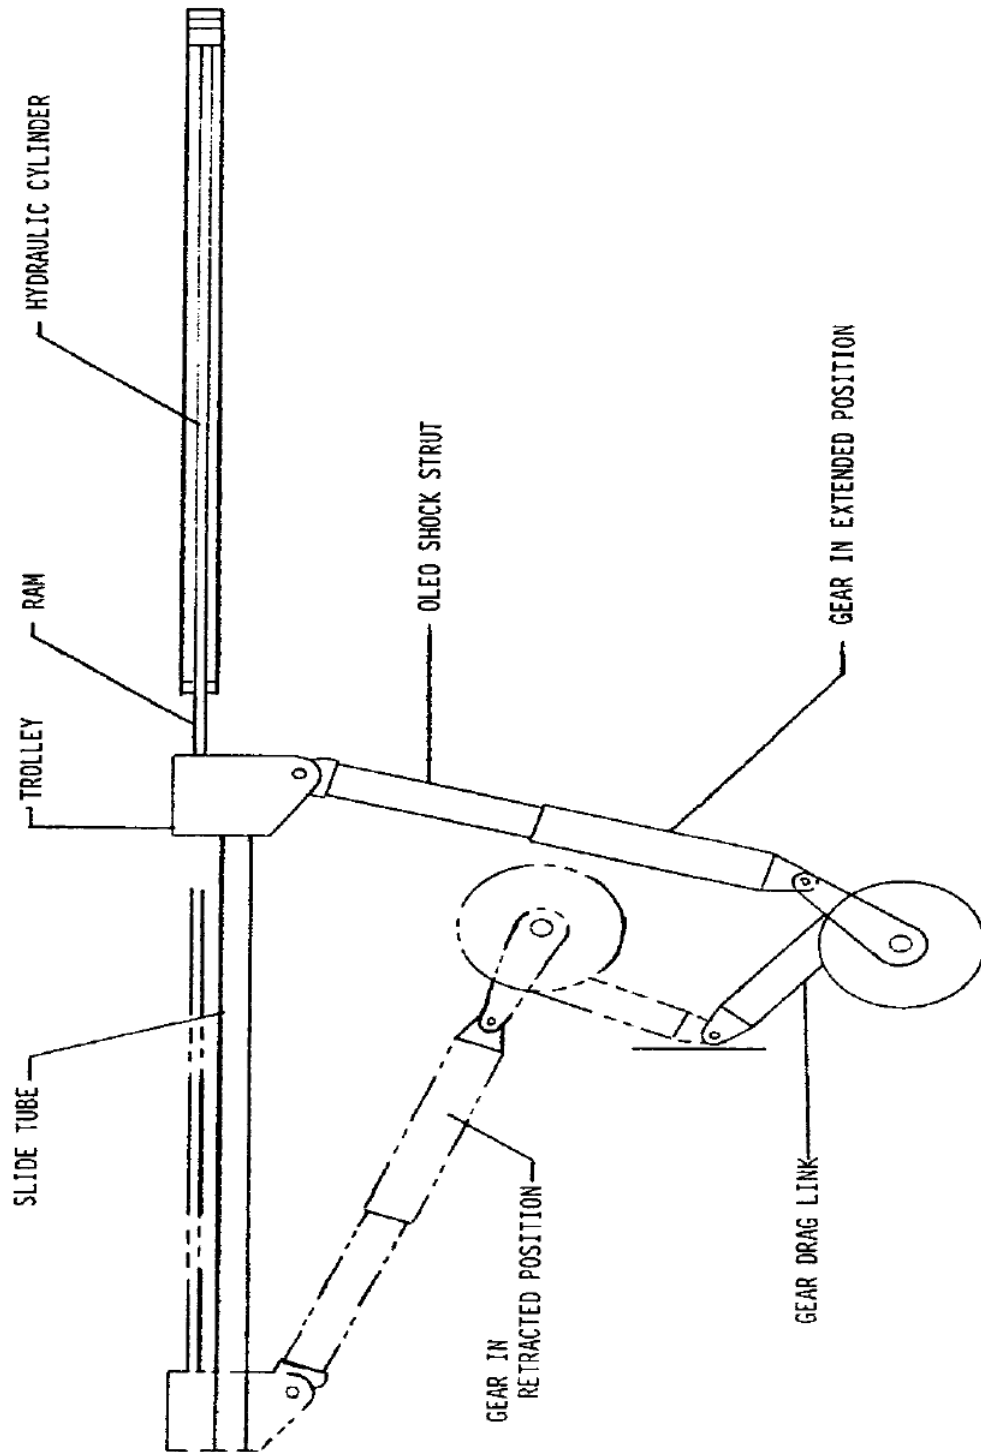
MAIN GEAR ACTUATION SYSTEM
